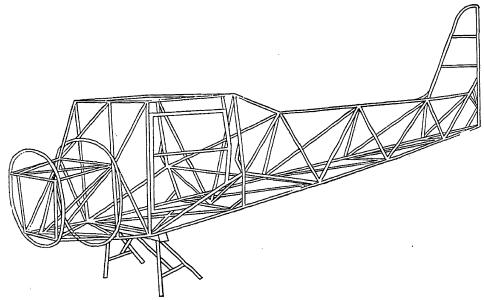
Welded-steel-tube fuselage of an Aeronca Chief.
